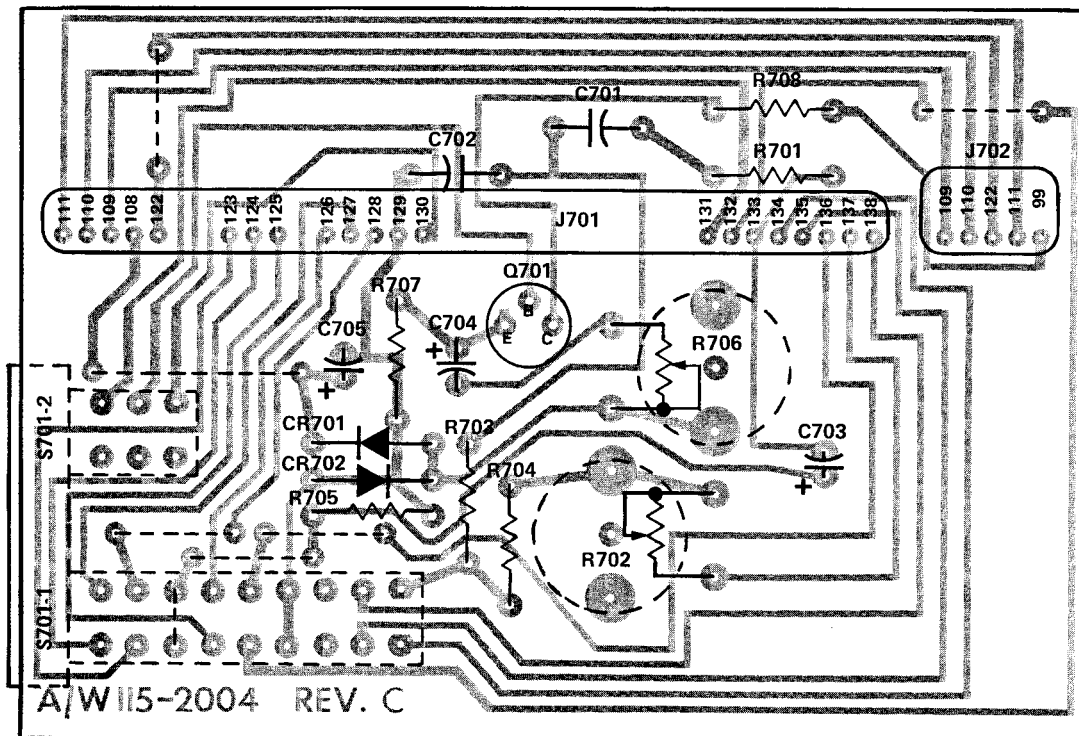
Tone Oscillator - Dolby Meter Board, Circuit Side
